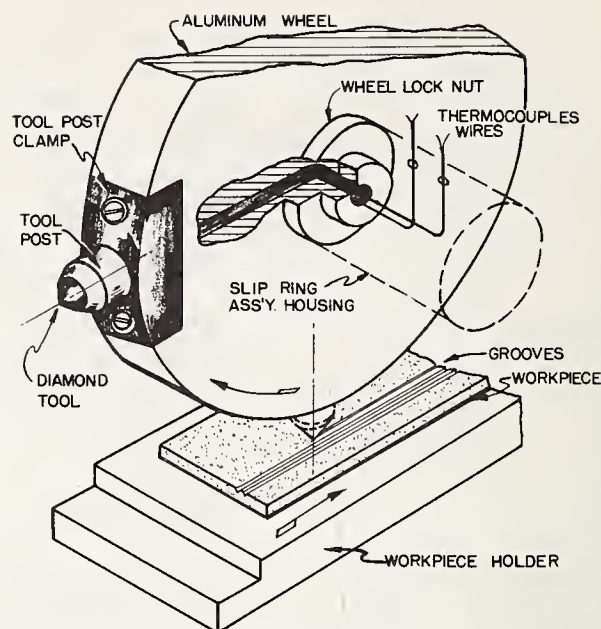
Perspective drawing of single point diamond wheel indicating diamond, thermocouple wires and slipring assembly mount.
